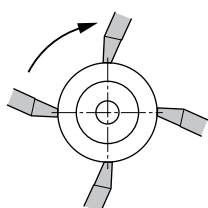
Checking the axial alignment with a calliper gauge - circumferential check
